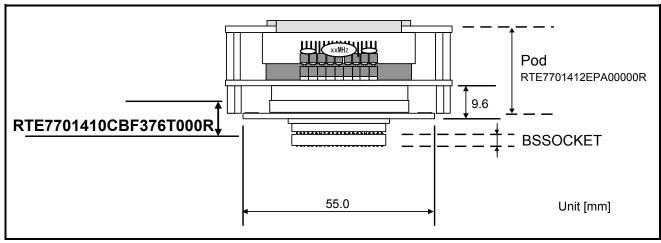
Drawing of the Socket Assembly (for RTE7701412EPA00000R)
